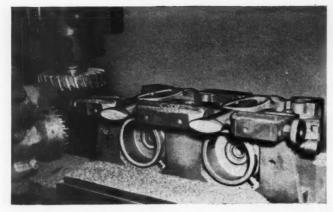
Use of carbide tipped cutters for milling off the motor-drive opening, bowl base housing, and supply can from the gray iron main frames enabled the Farm Implements Division to triple its daily output of frames — from an average of 50 to 150. Average production between grinds has increased from 225 to 4.500 frames.
